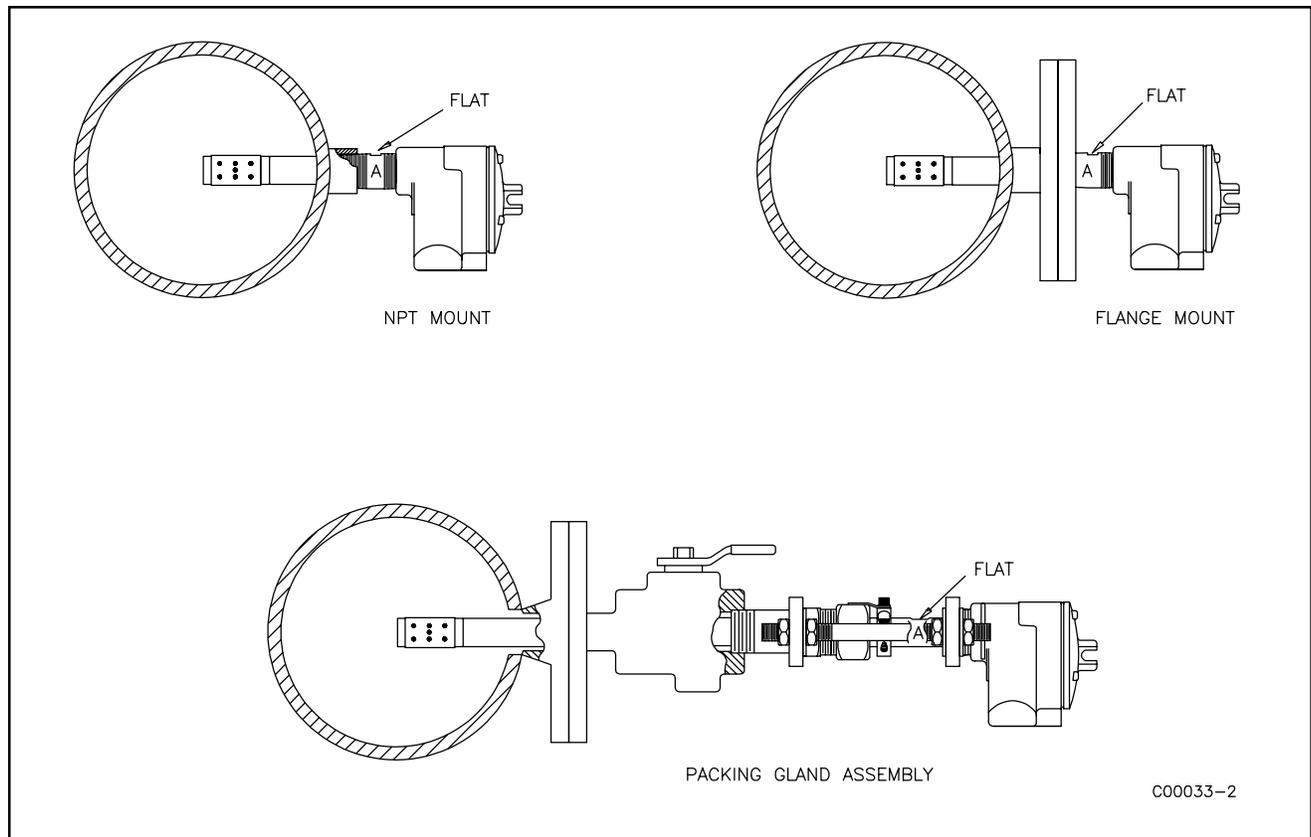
Pipe, Flange and Packing Gland Assemblies
